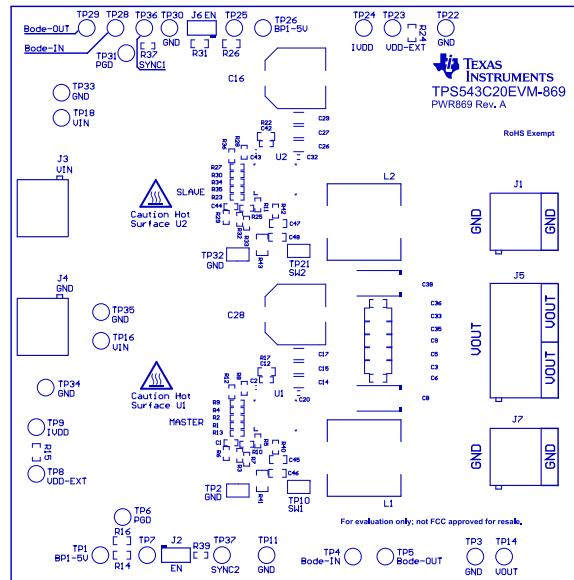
TPS543C20EVM-869 Top Layer Assembly Drawing (Top View)
